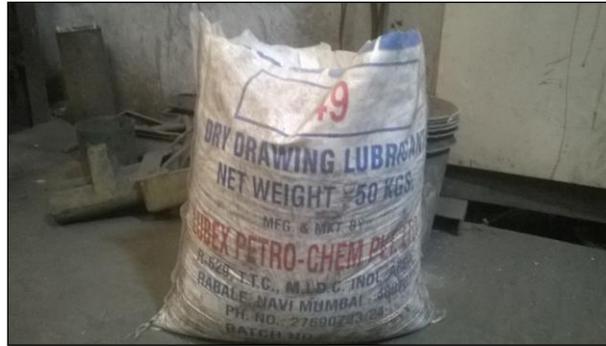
Dry Drawing Lubricant used by Weld well company
